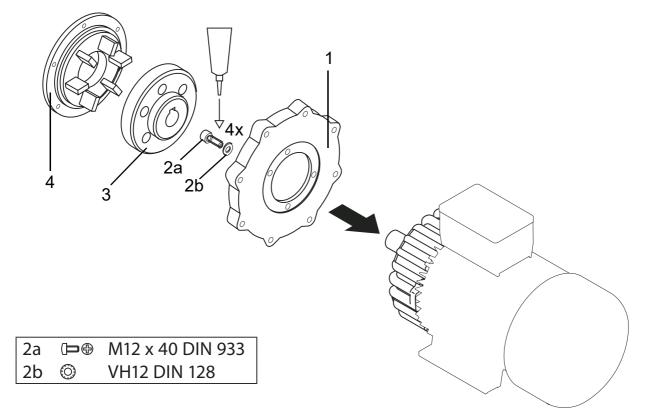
Assembly of flange mount (dual-bearing, BG 132 model with reinforced bearing plate)
